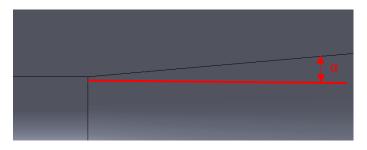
DETAILED VIEW OF THE NOZZLE'S EXPANSION SHOWING THE EXPANSION ANGLE
